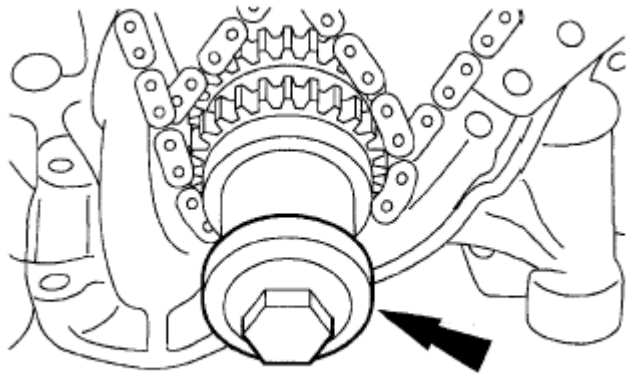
Locating Crankshaft Pulley Bolt And Washer
